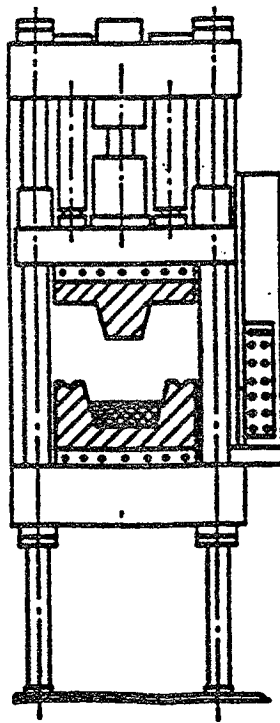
Press for compression moulding shown with mould open and loaded with moulding material.
